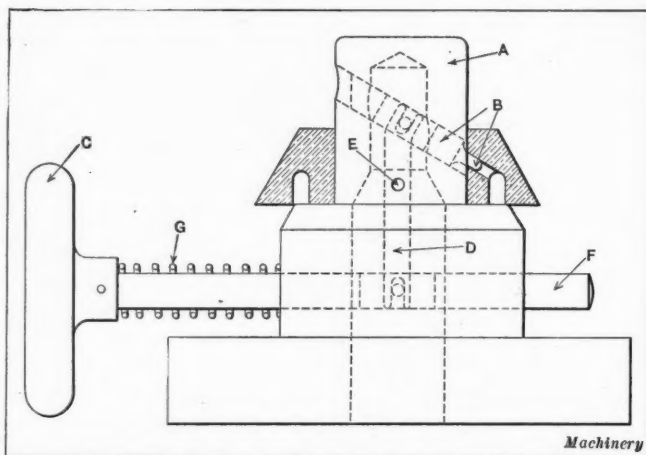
Fixture used on Lighting Line Marking Machine shown in Fig. 14
